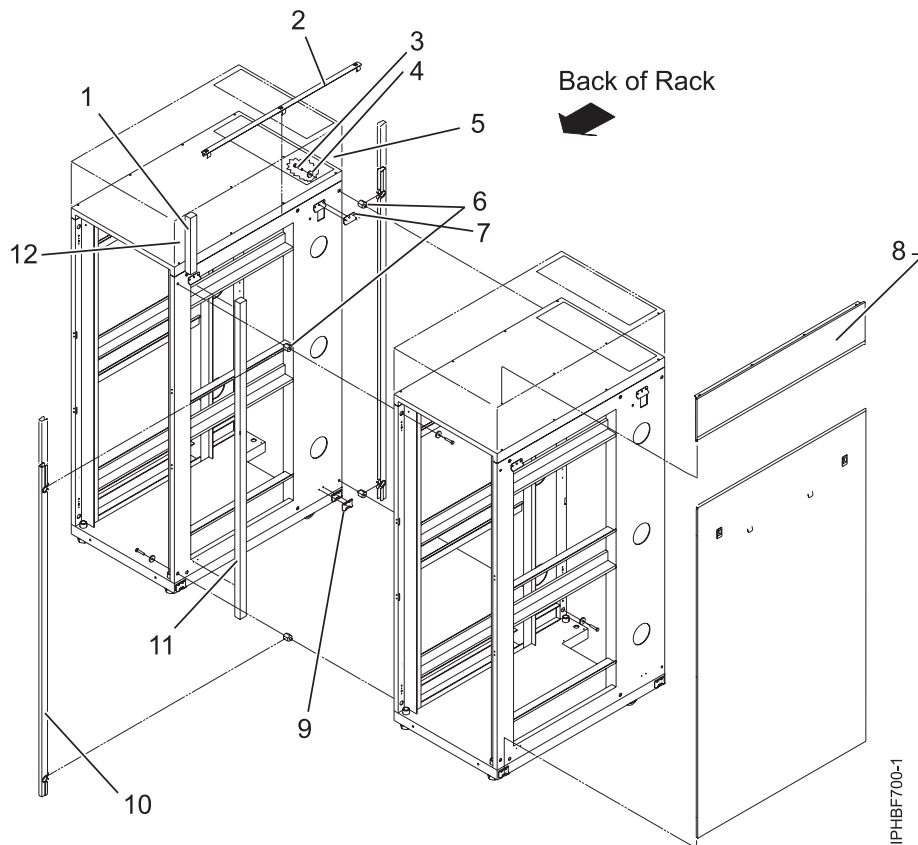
Removing the side panels, Z and J brackets, and installing standoffs and long foam to connect multiple racks
